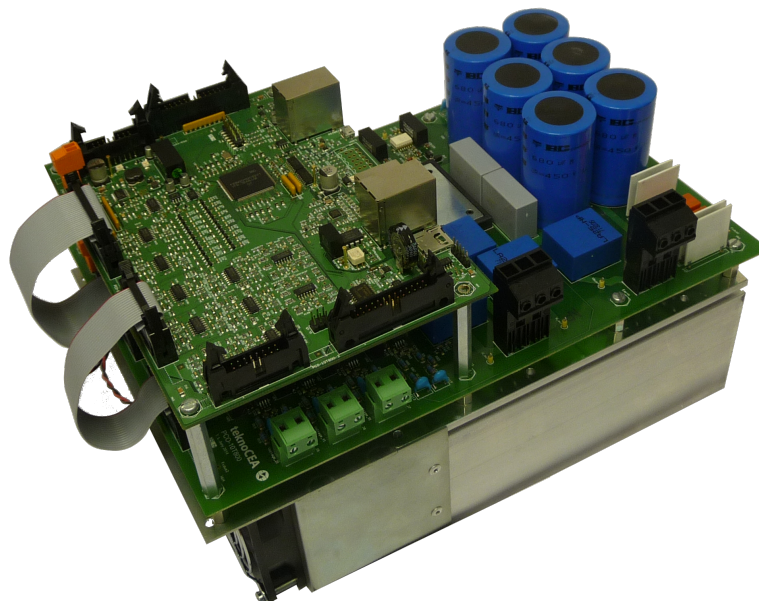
PCO-10T800 and CDA01-CU3 assembly.
